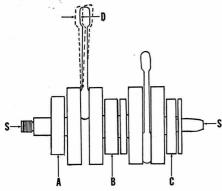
With crankshaft supported between centers (S), crankshaft eccentricity when measured at points (A, B & C) must be less than 0.06 MM (0.0024 in.). Connecting rod play (D) should be less than 3 MM (0.118 in.).
